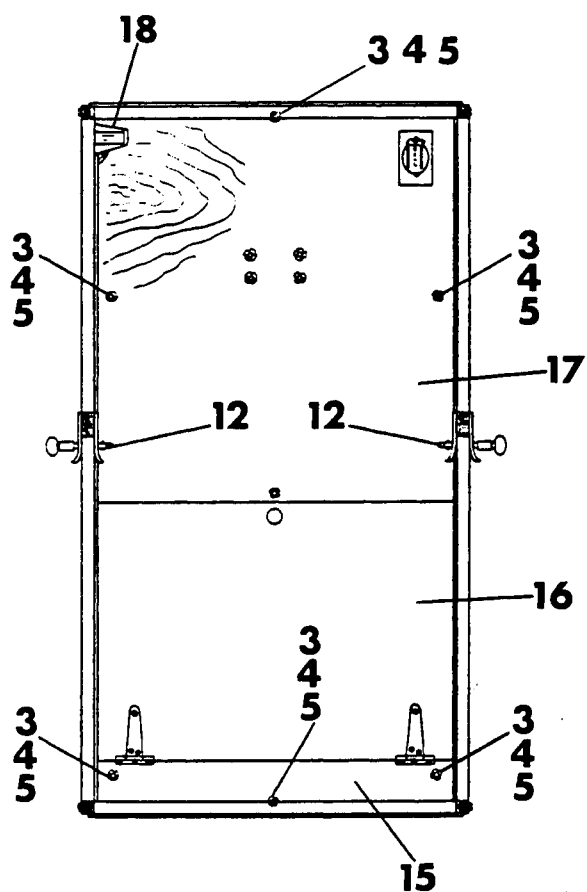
PLATFORM ASSEMBLY (30X30)
